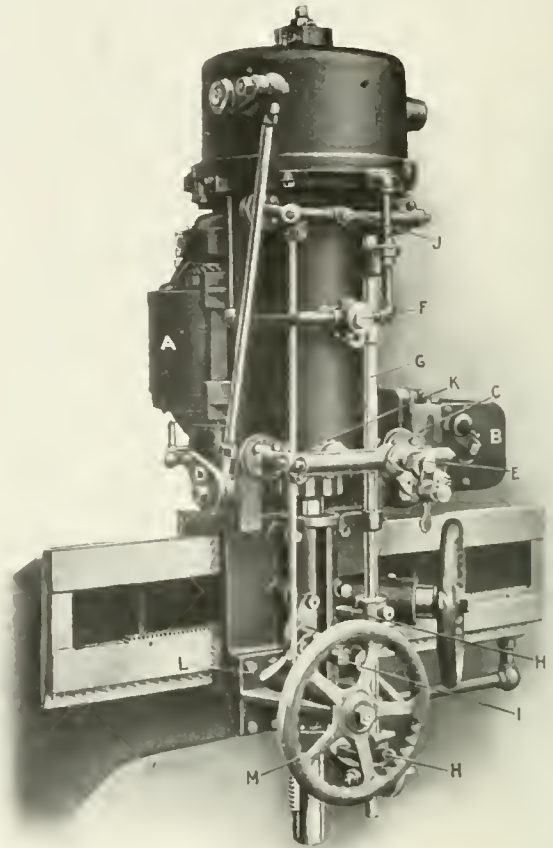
Drilling Head of the Hydro-pneumatic Machine
